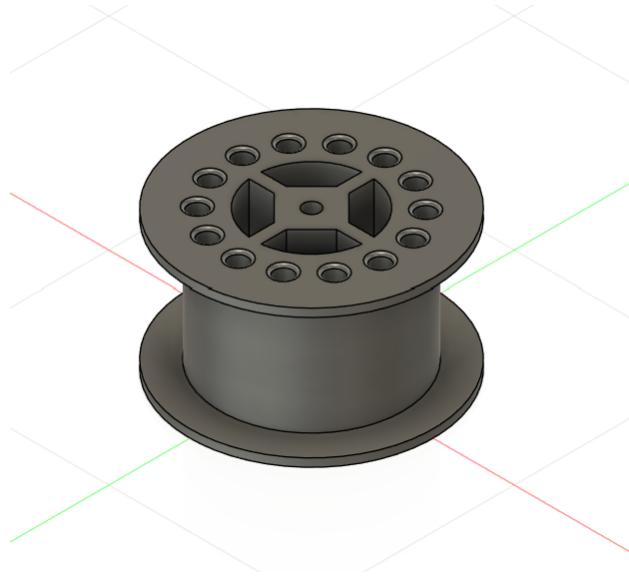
The motor-driven winch spool. The cylindrical drum stores the line, the flanges retain the winding, and the mounting-hole pattern connects the spool to the winch drive interface.
